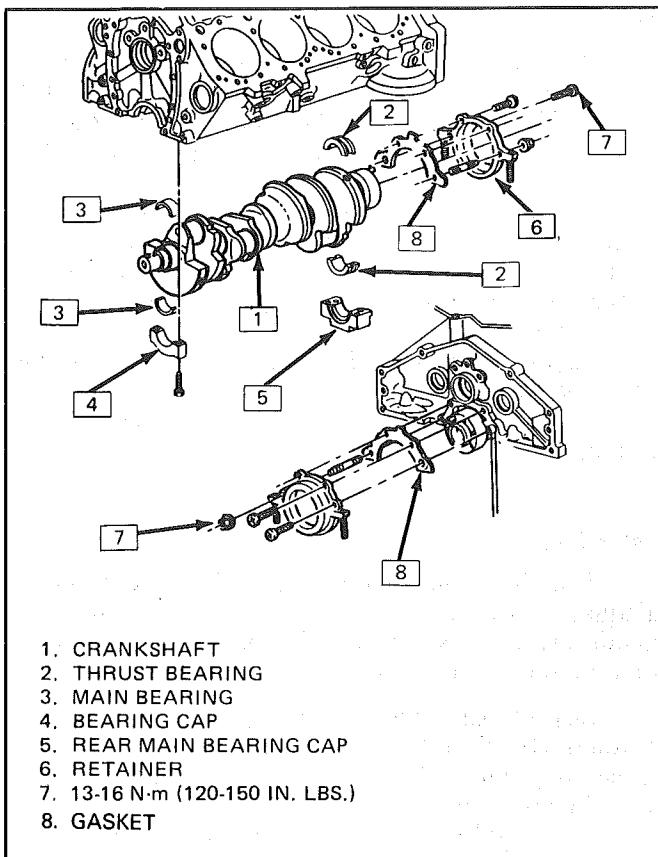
A3-42 Crankshaft Oil Seal-Rear Main
